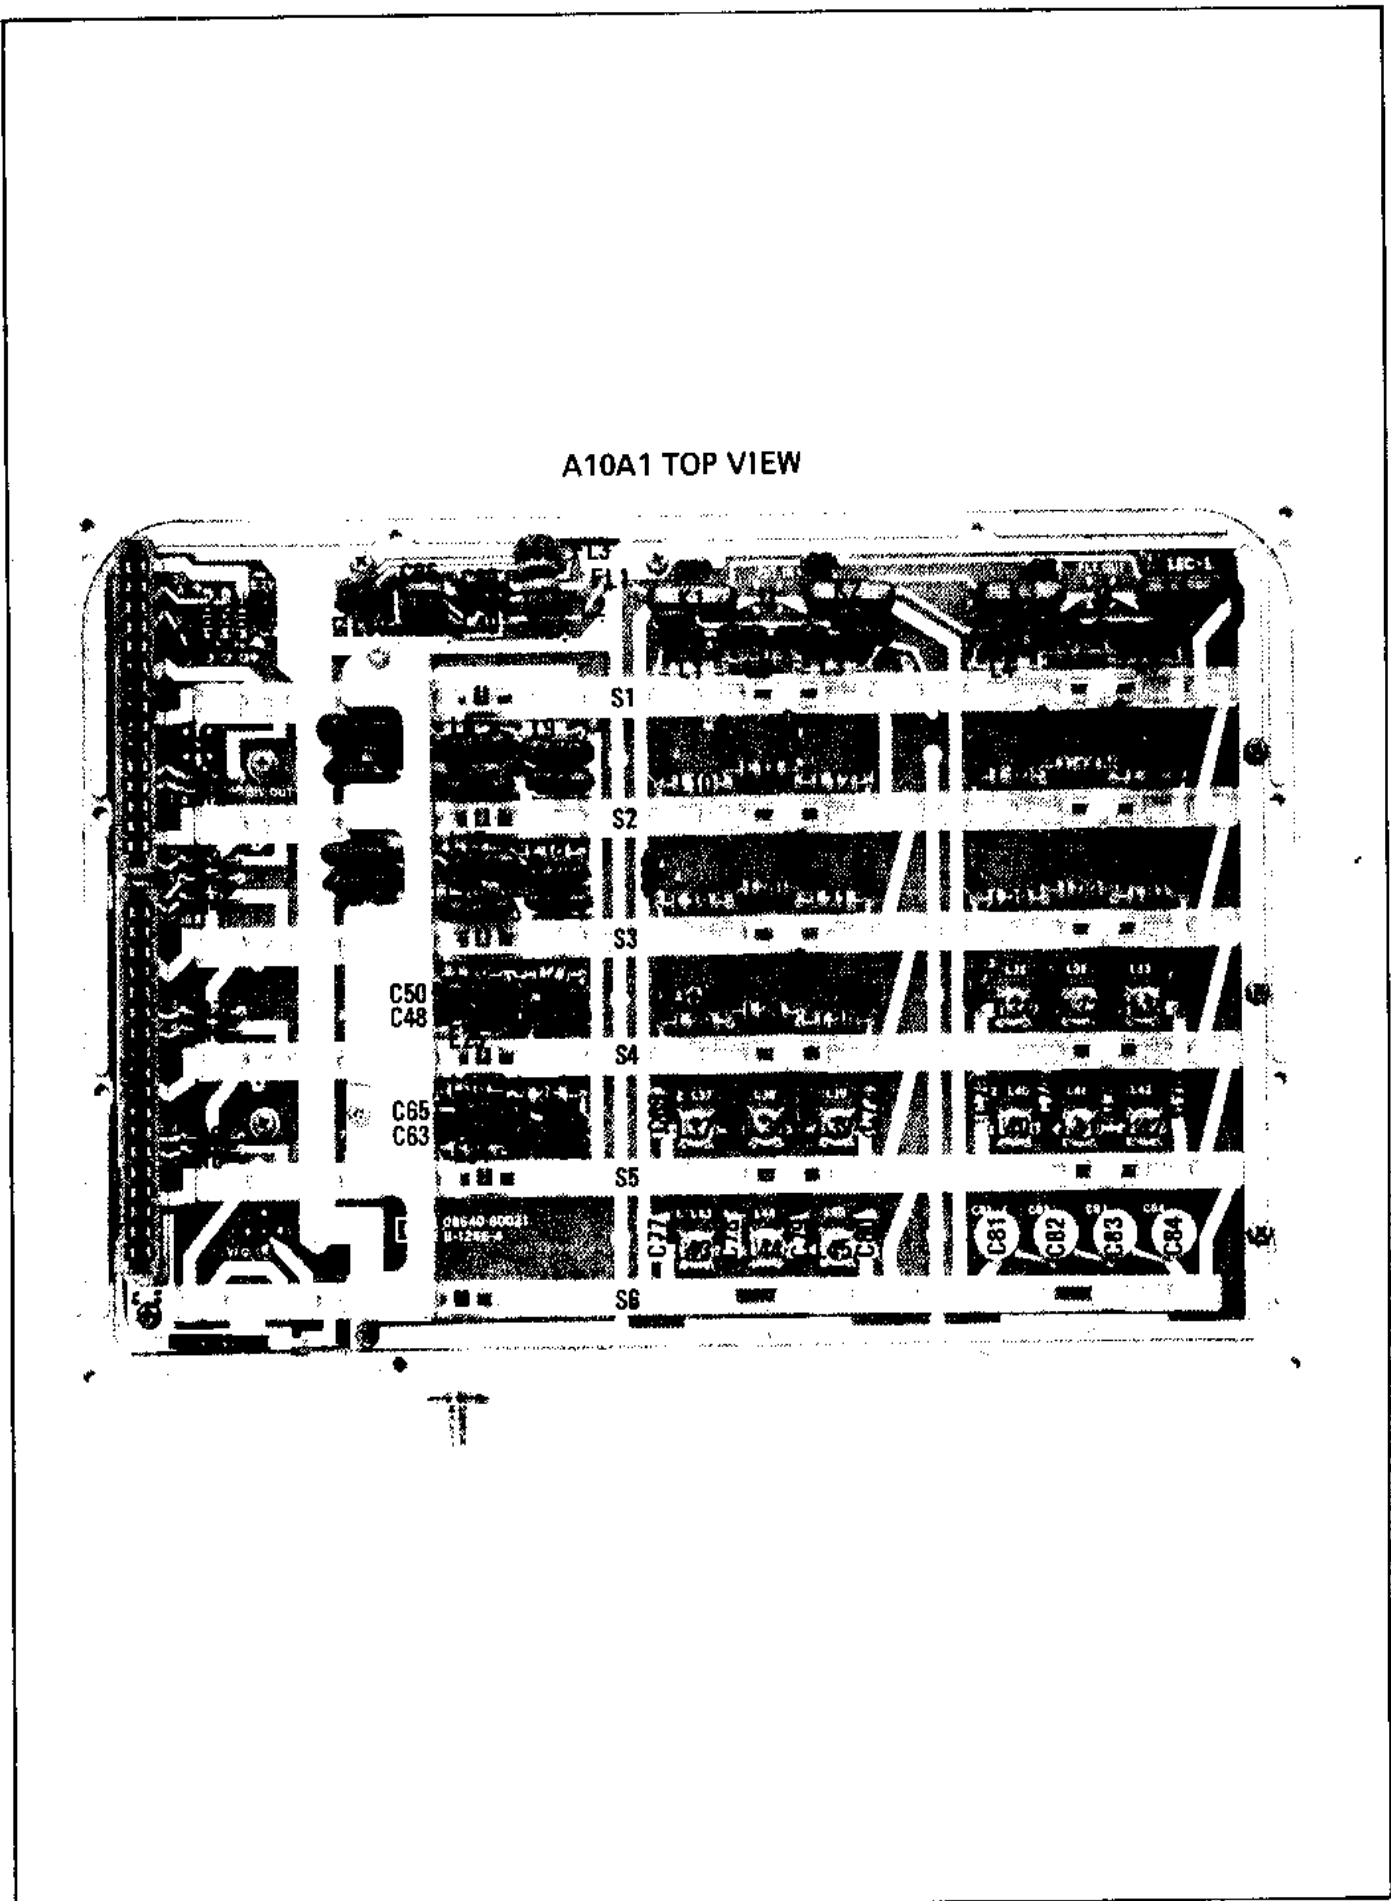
A10A1 RF Filter Assembly Component Locations (2 of 2)
